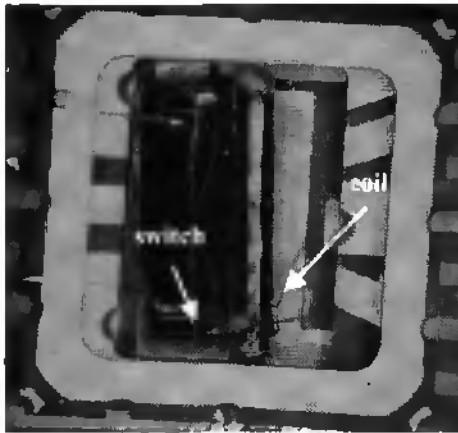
Photograph of the wire-bonded iron-nickel relay and the self-test coil mounted on the SMD package.
